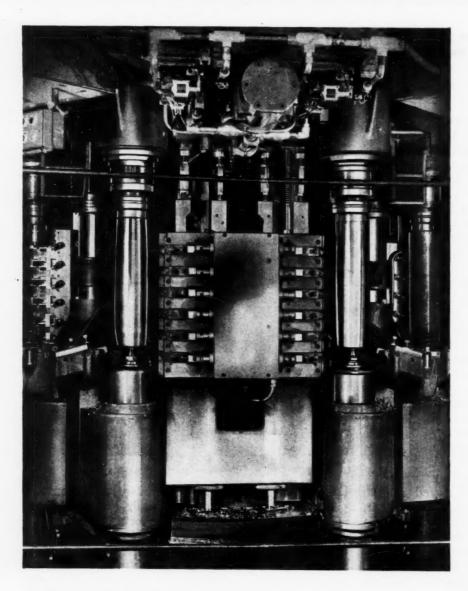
Close-up View of Tooling of a Barnes Four-station Centercolumn Machine Used for Roughturning the Forgings
